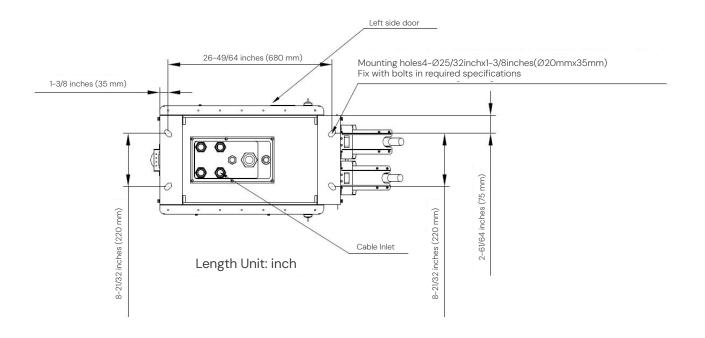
B Hole positions and dimensions at the bottom of User Terminal
